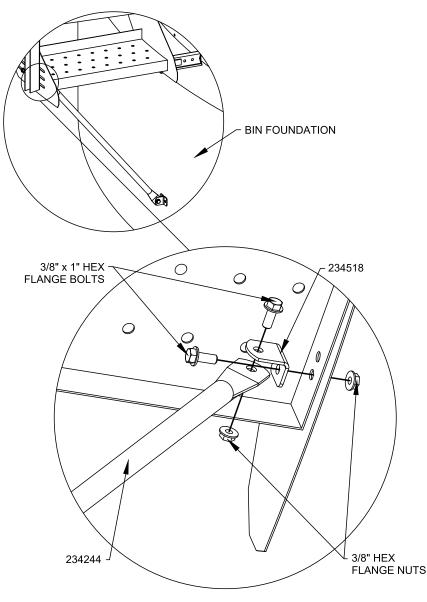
Bottom Post Brace For Stairs Not Overhanging the Foundation
